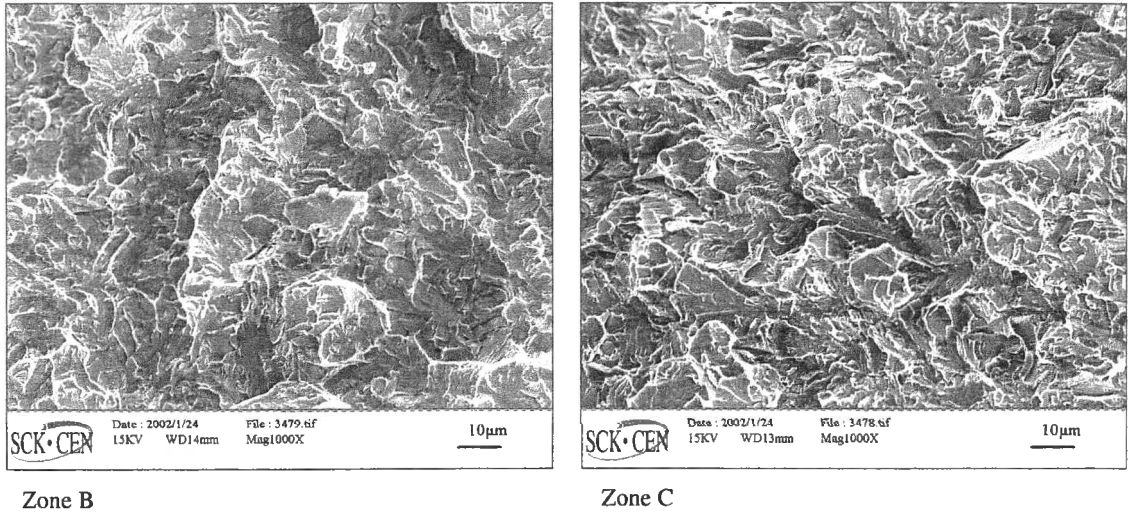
The specimen surface can be divided into larger zones : precrack zones A and D, ligament zones B and C.
